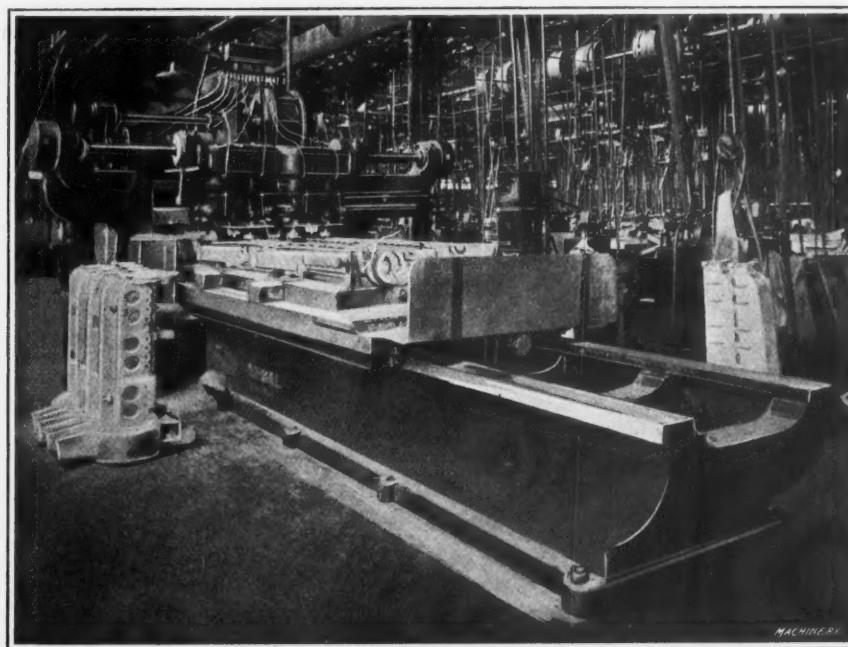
Ingersoll Planer Type of Milling Machine on which First Operation is performed on Crank-cases
